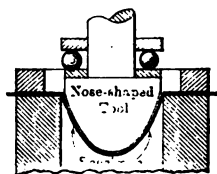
Showing Arrangement of Specimen, Tool and Dies on Erichsen Cupping Machine. (*Proc. A.S.T.M.*, Vol. 17, Pl. 2, p. 200.)
